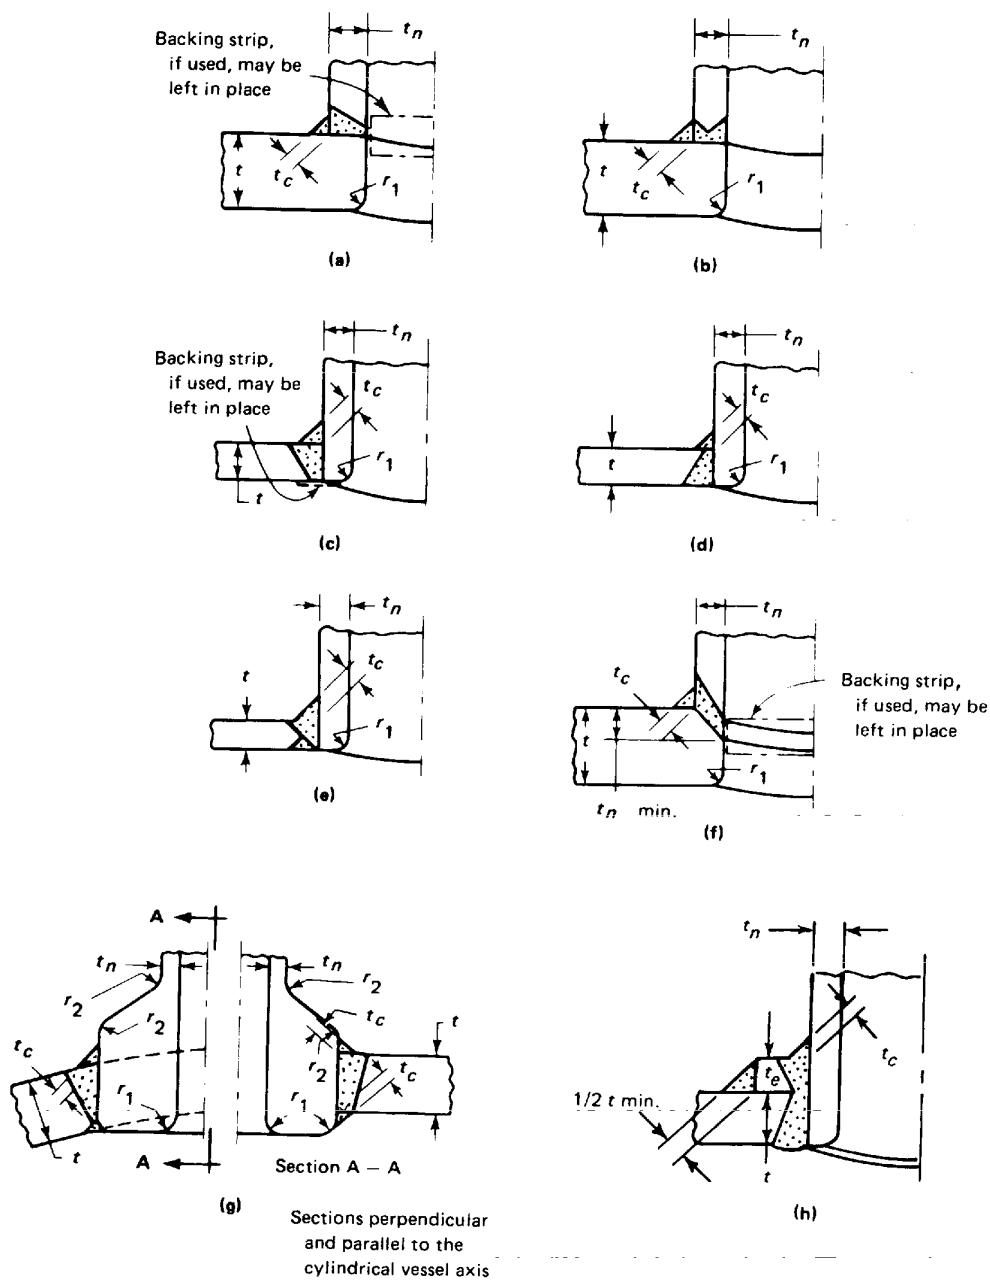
(b)-1 NOZZLES ATTACHED BY FULL PENETRATION CORNER WELDS
